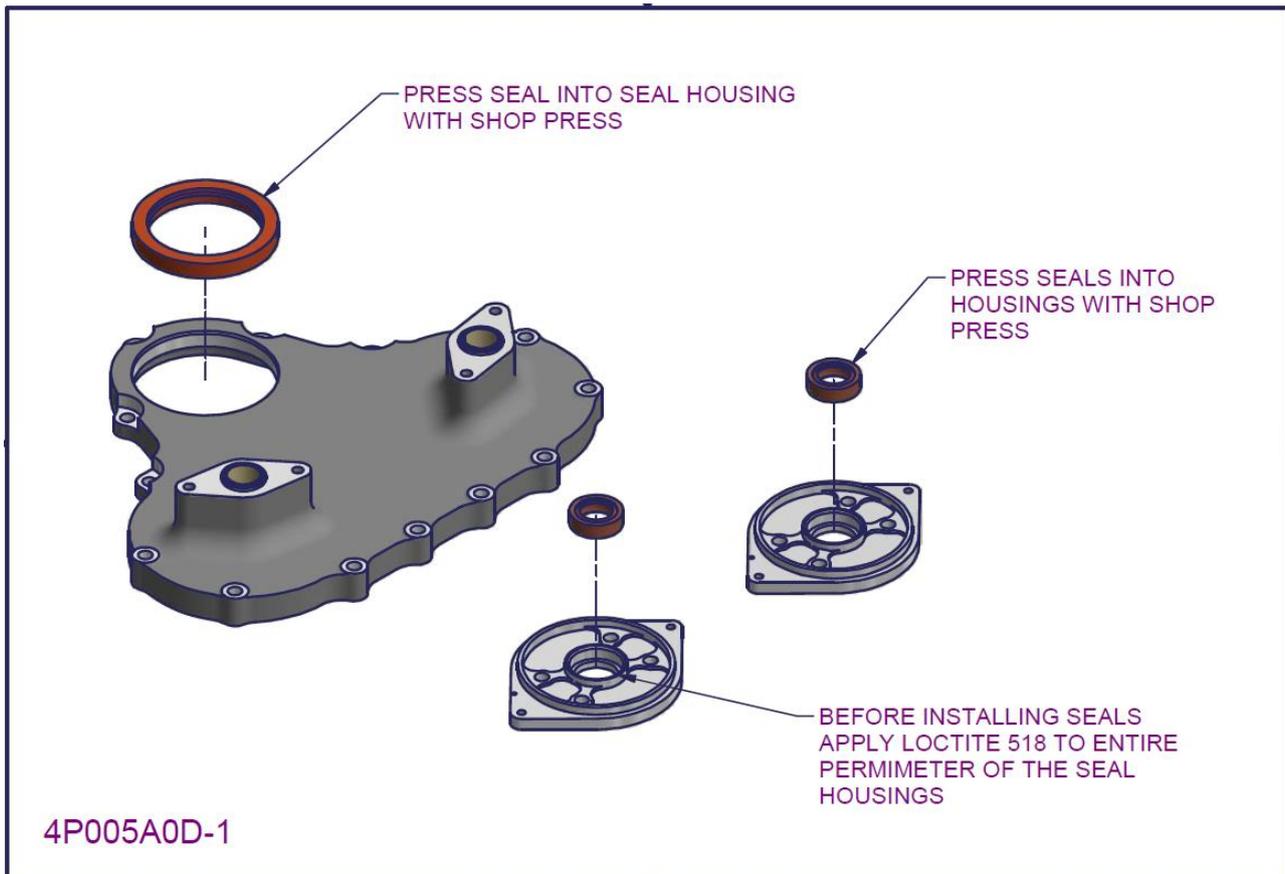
2200/3300 Distributor gearbox subassembly 2
